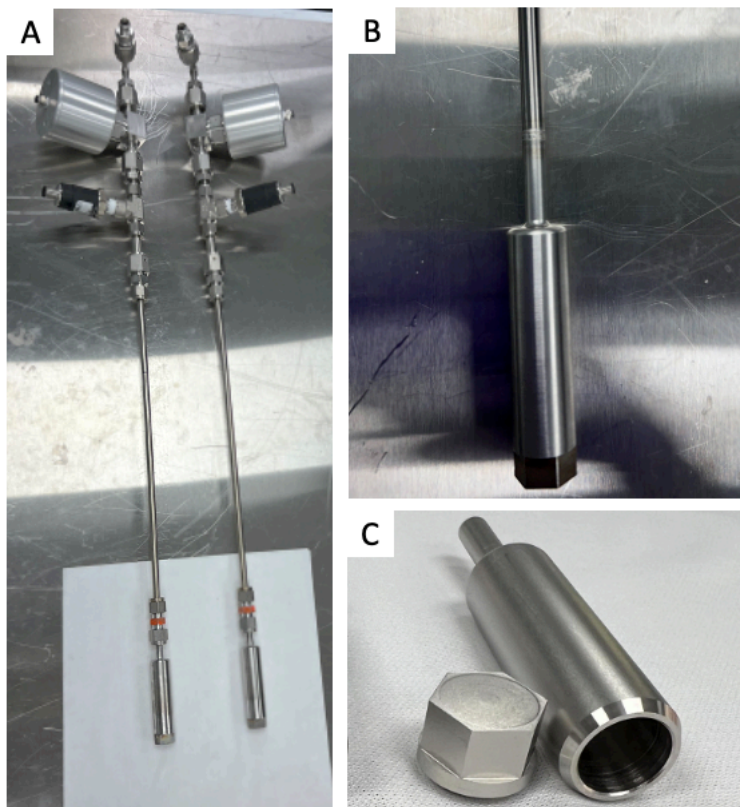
A) Early downtube assembly showing pressure inlet, isolation valves, pressure transducers, and filtered fittings to the vessels. B) Leaks were prevented by orbital tube welding the mono-block vessel to the downtube assembly. C) In order to achieve leak free mono-block vessels with large sample volume and small thermal mass, the vessels were cut open, precision hollowed out, and welded back together.
